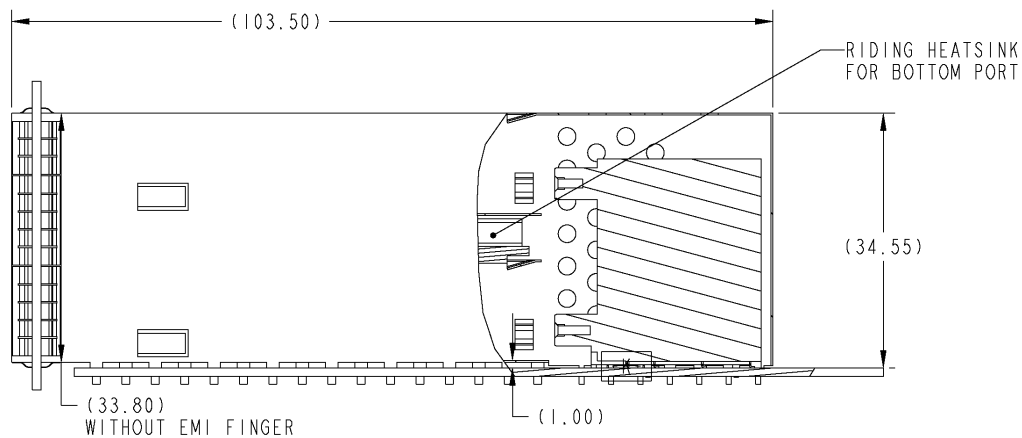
Side view of 2x1 cage with vertical cage dimensions, 19.9mm pitch
